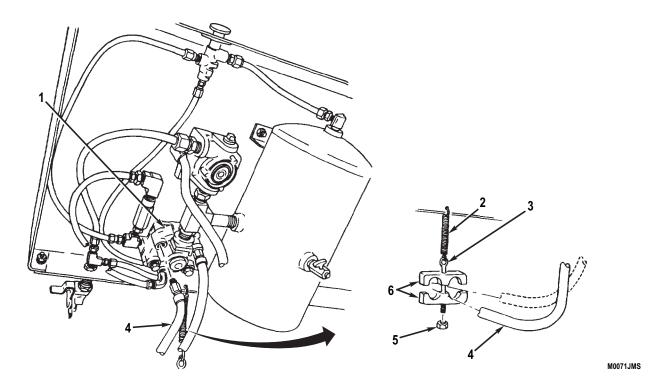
Relay Emergency Valve-to-Airbrake Chamber Hose Assembly Removal.
